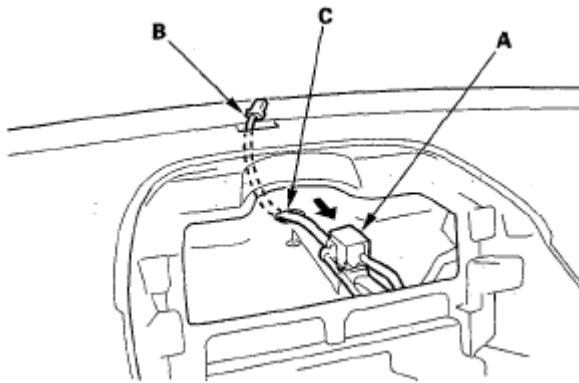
Identifying Connectors, Sunlight Sensor Connector And Hole
